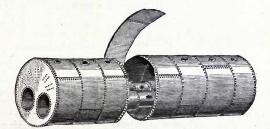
Explosion of a Lancashire-boiler from external corrosion, due to improper setting.
